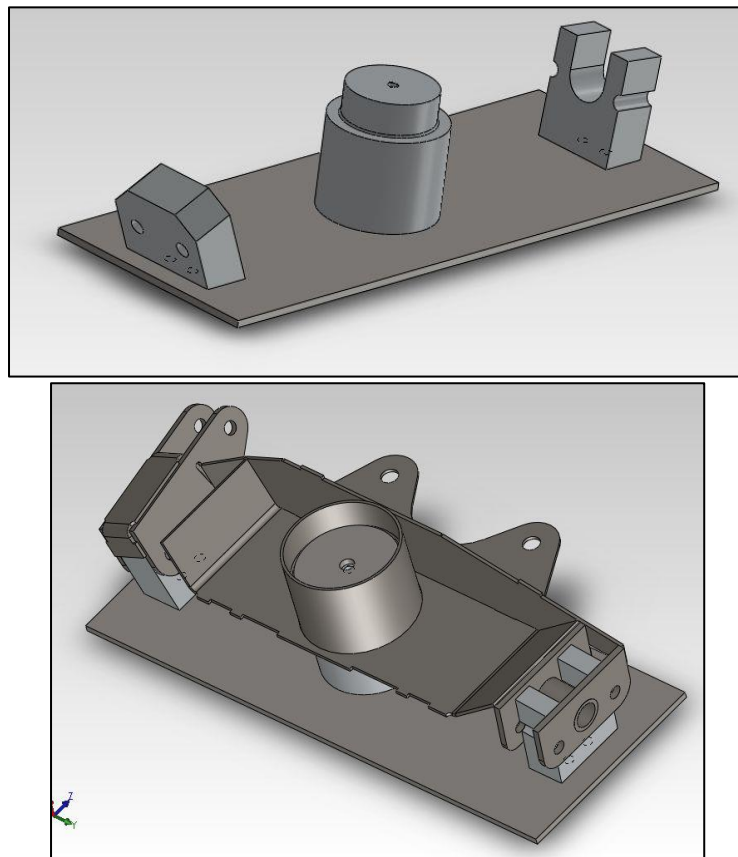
Front Upright Jig and Partially-Constructed Left Front Upright
